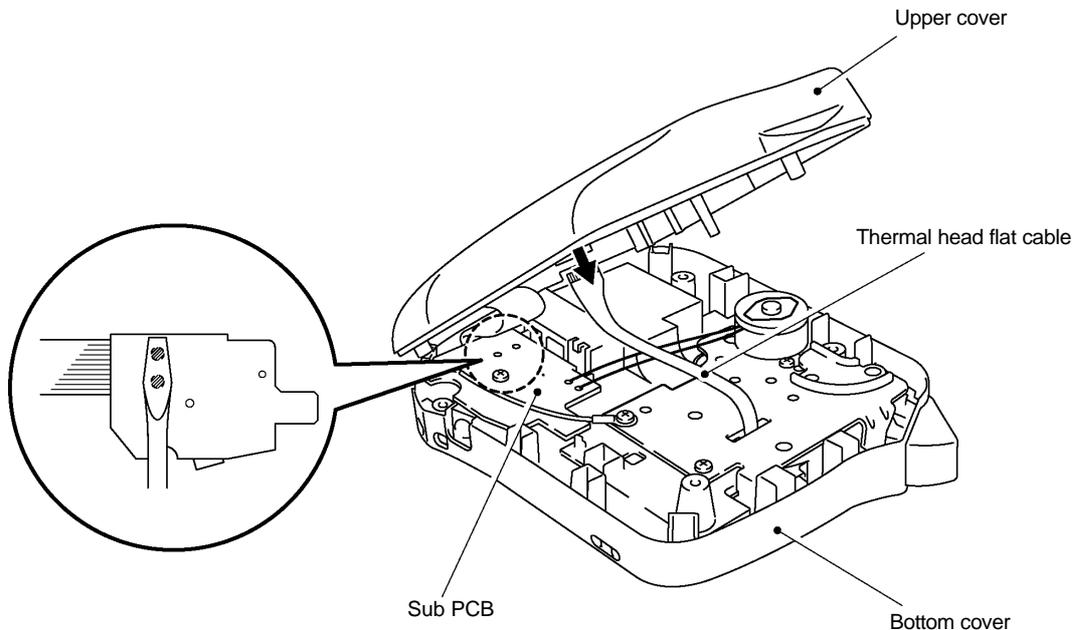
Removing the Bottom Cover, Cutter Case ASSY and the Board (2)
